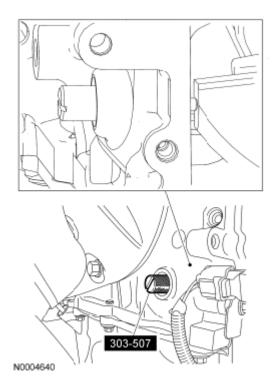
Identifying Crankshaft TDC Timing Peg (303-507) Courtesy of FORD MOTOR CO.
